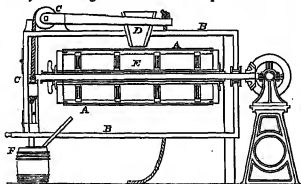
Horizontal Dusting Reel (longitudinal section). A, cylindrical reel; B, reel case; C, apparatus for lowering one end for unloading; D, hopper for loading; E, opening in reel for loading; F, barrel for unloading into.
